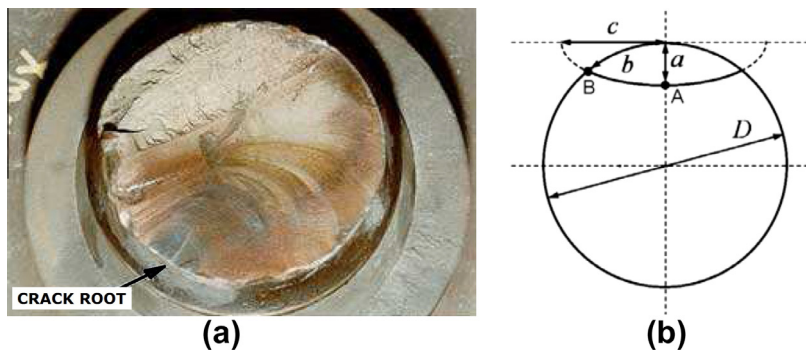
Example of fatigue crack and failure in the area between the journal and the wheel seat (a); crack model (b) [16].
